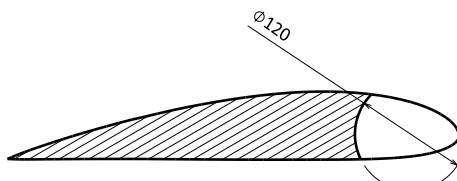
Sectional View of the Airfoil with Dimensions At A-A.
